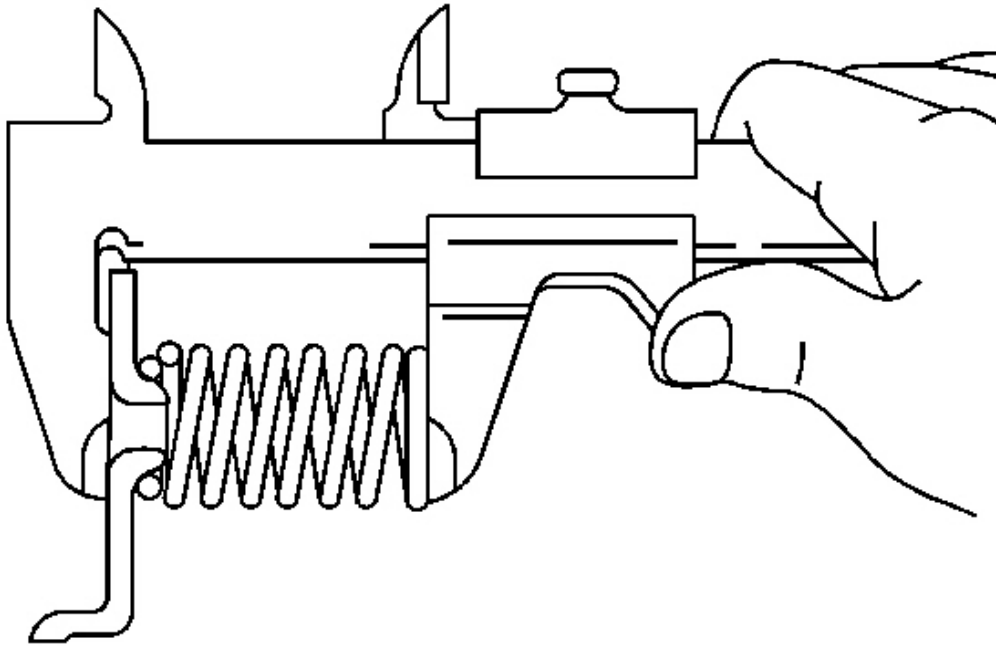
Measuring The Free Length Of 1st & Reverse Brake Piston Return Spring Using The Vernier Calipers
